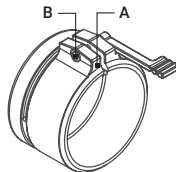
FRONT ADAPTER LEVER ADJUSTMENT
